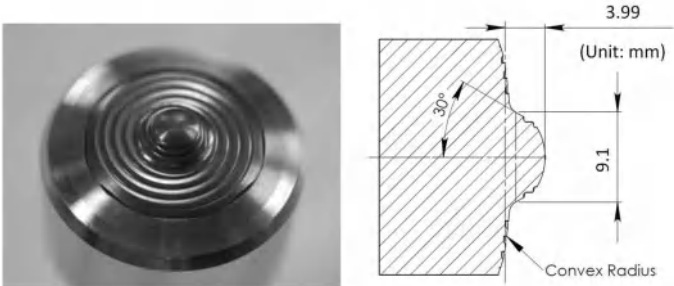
Appearance and dimensions of the Q60 tool used in this study.
